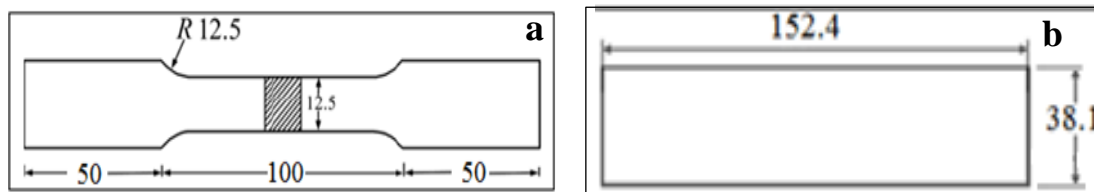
a) Tensile test specimen (all dimensions in mm) (ASTM E-8M) b) Bending test specimen (all dimensions in mm) (ASTM E-190M)
